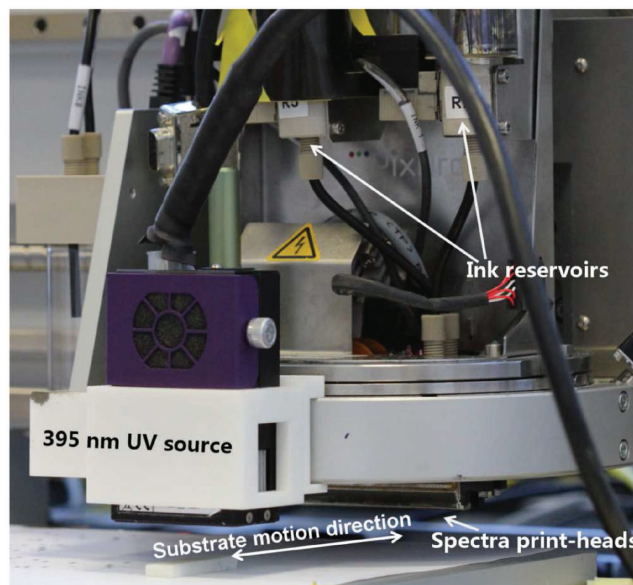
Printing apparatus with UV installed on the print-head assembly.
